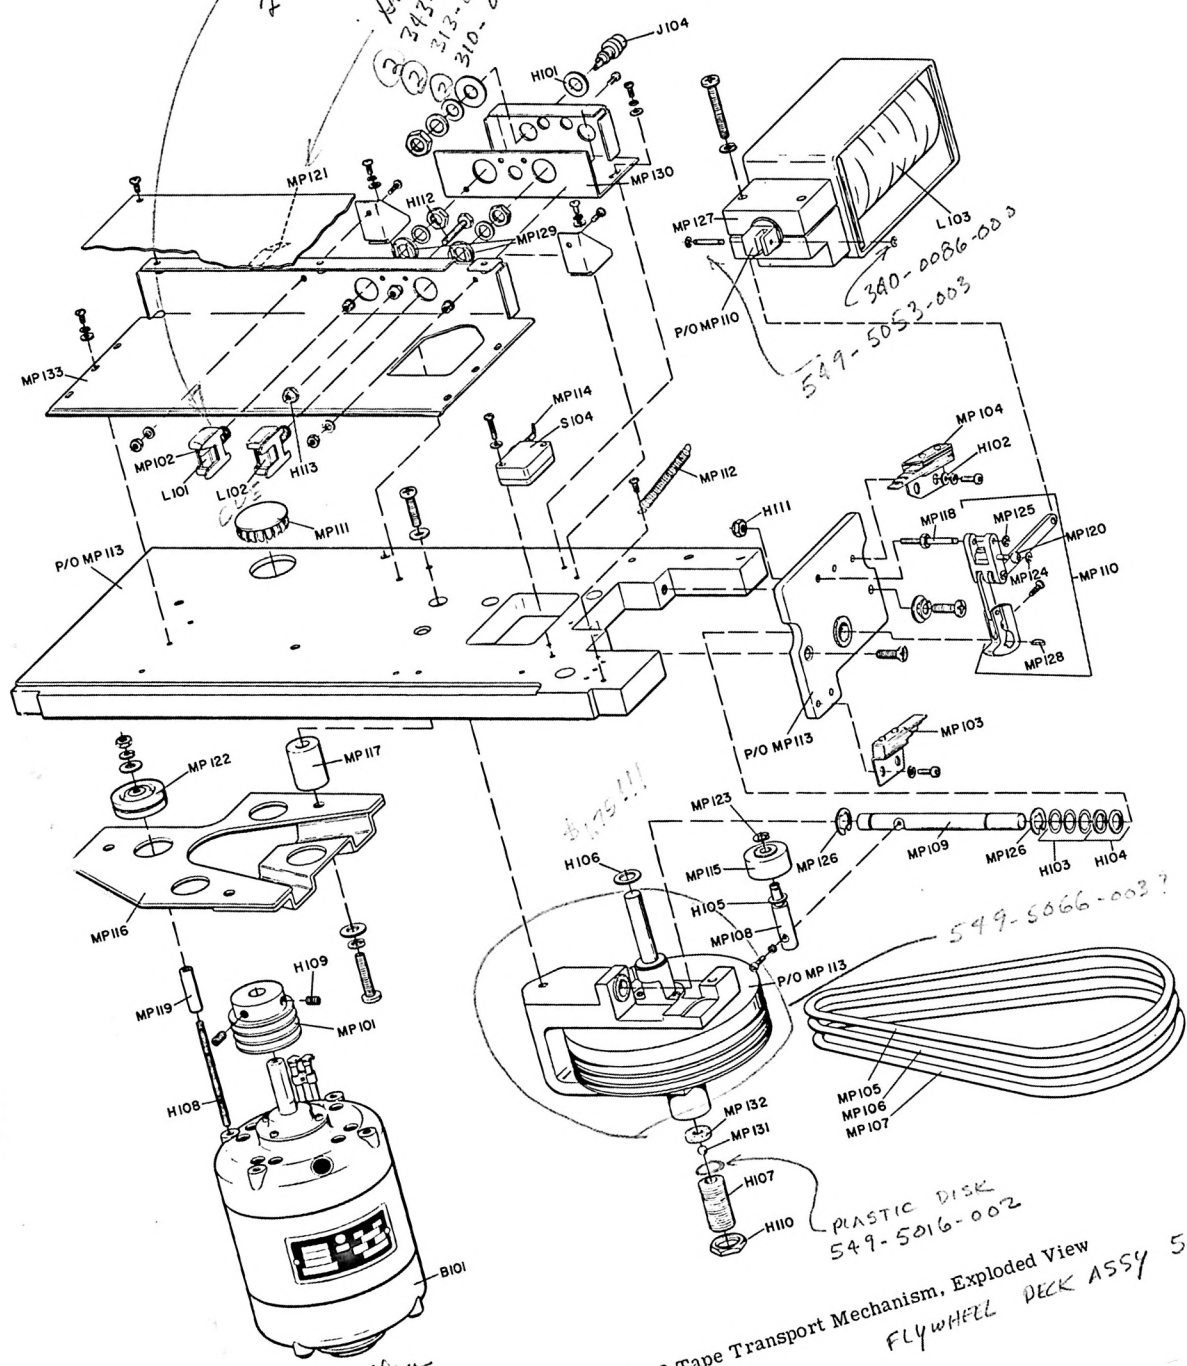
642A-2 Tape Transport Mechanism, Exploded View
